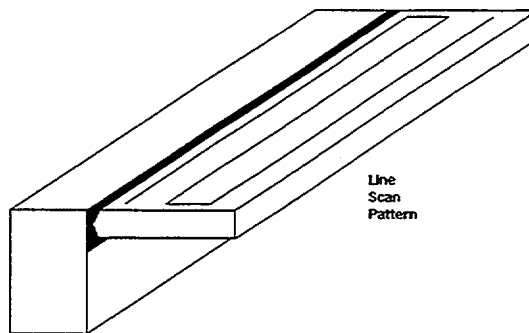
Scan pattern used in array inspections of core shroud welds.
